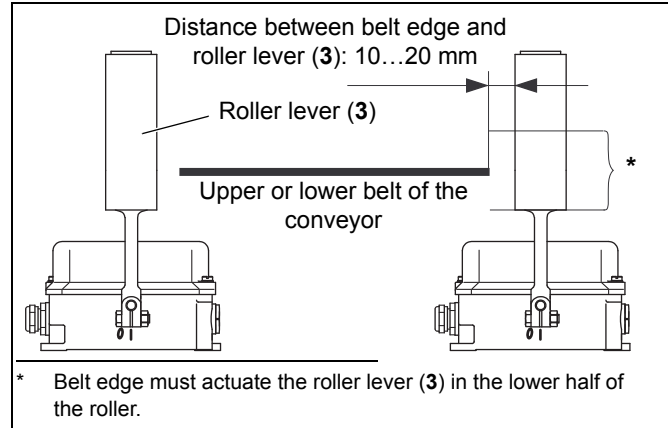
Mounting paired belt misalignment switches on the conveyor
